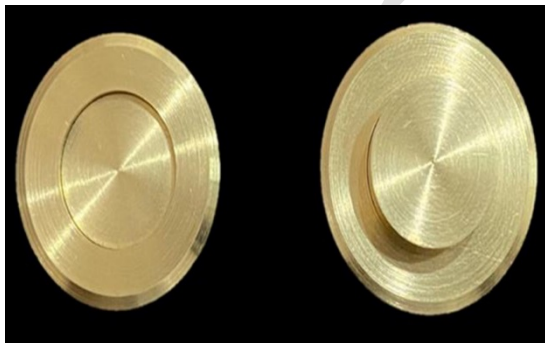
Custom metal molds for pattern fabrication in desired dimensions.
